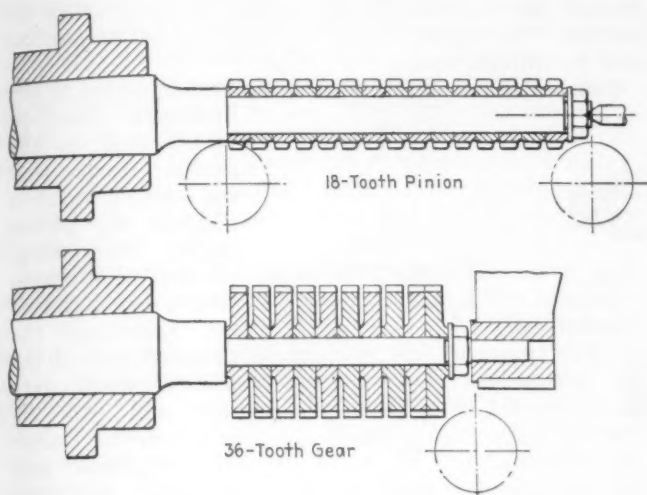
HOLDING GEARS FOR ROUGH-CUTTING
